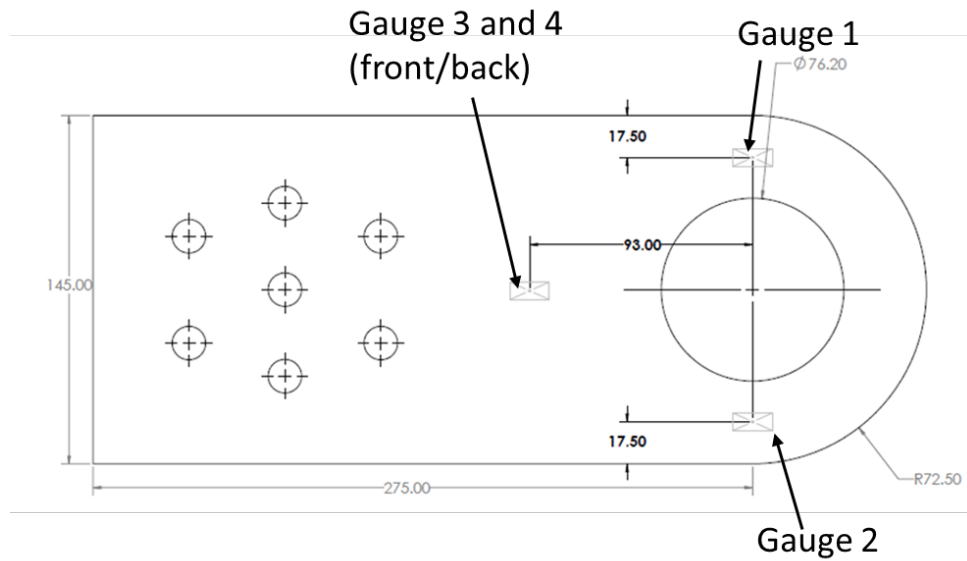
Nominal Lug Design with Tooling Mold Diameter set at 76.2 mm
